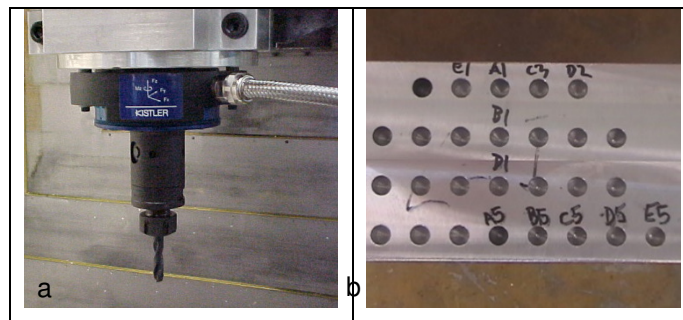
a) Drilling experimental set up b) Aluminum 60601-T6 drilled specimen
